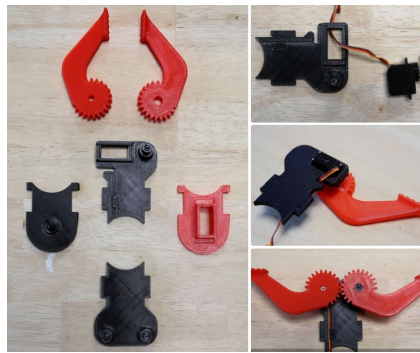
Robotic arm parts 3D printed using low-cost FDM technology [2]
